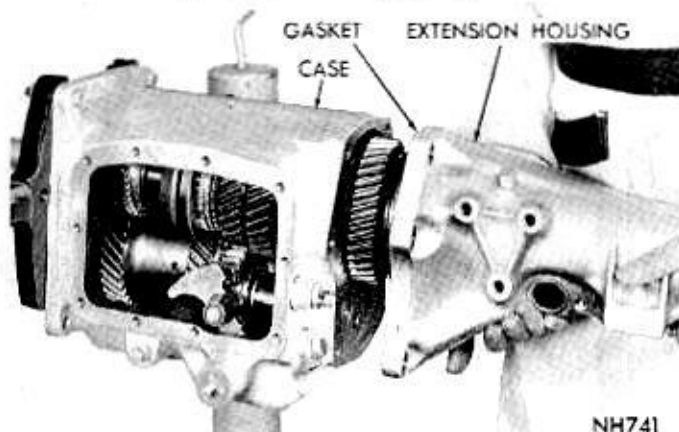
Removing or Installing Extension Housing and Mainshaft Assembly
